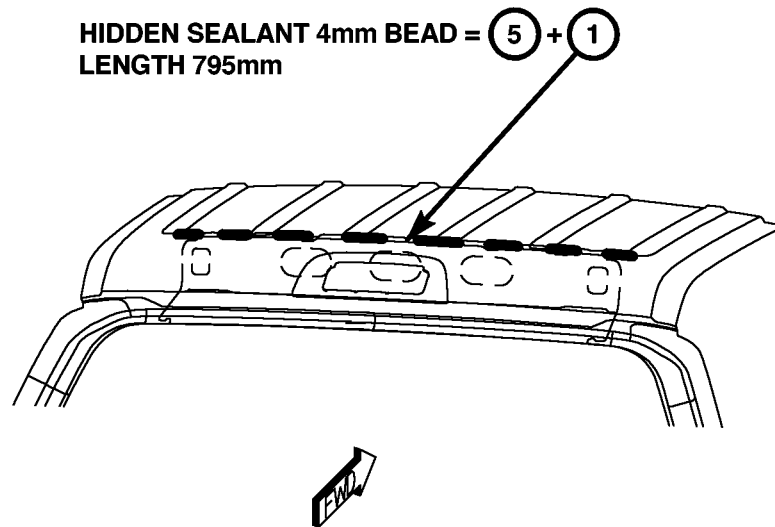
ROOF PANEL/REAR ROOF HEADER
